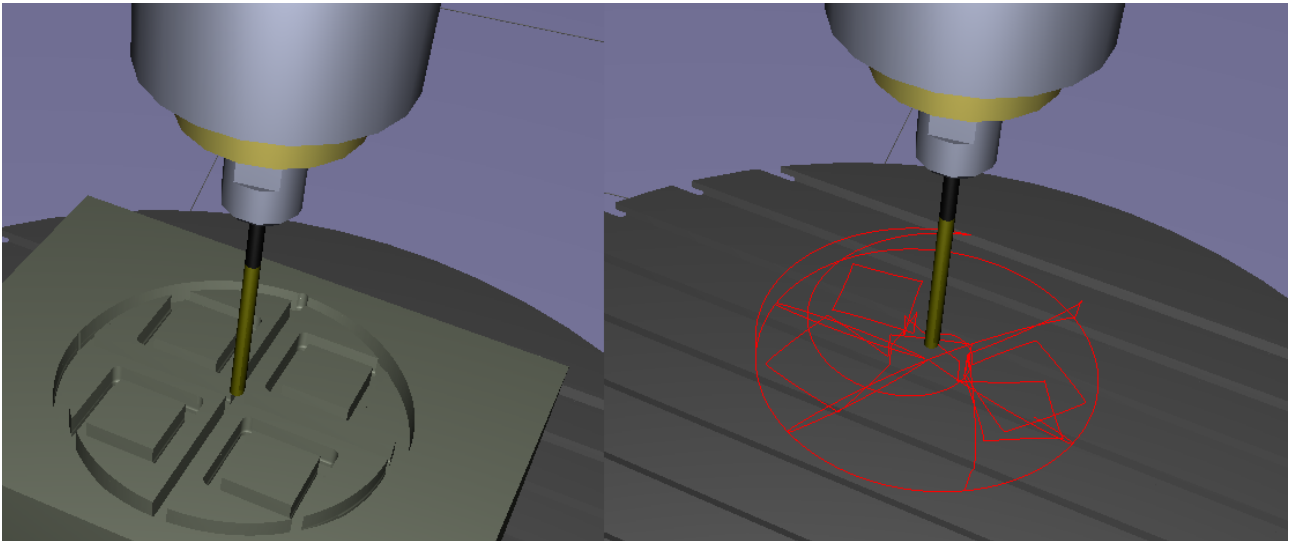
Machined workpiece (left) during a rotation; the trace view on the right
